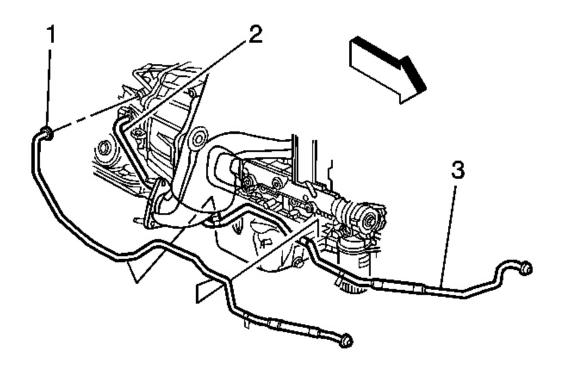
View Of Transmission Fluid Cooler Lines Courtesy of GENERAL MOTORS CORP.
